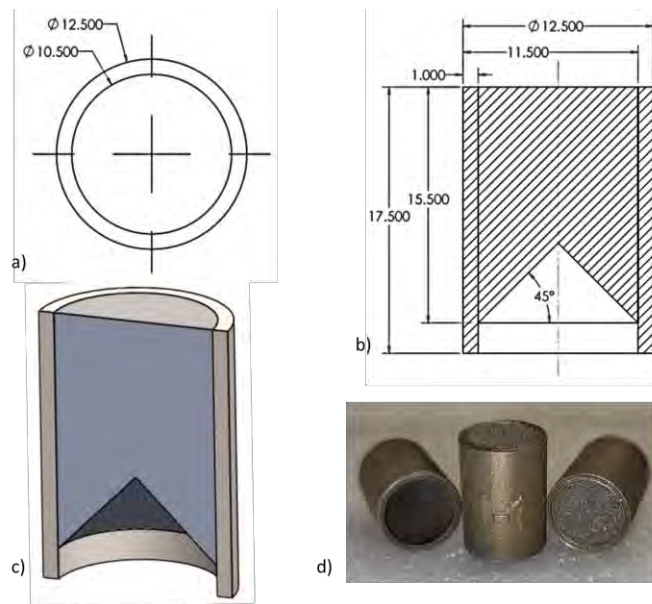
a) Plan and b) elevation drawings of the 3D printed wick sample, c) a vertically-sectioned CAD rendering of the wick sample, and d) a photograph of the wick samples.
